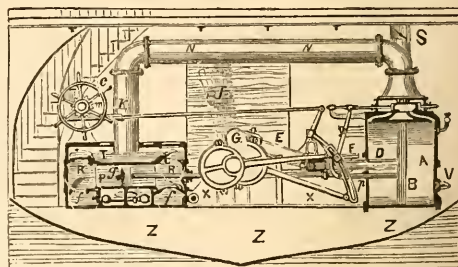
Horizontal direct-acting Naval Screw Engine.
